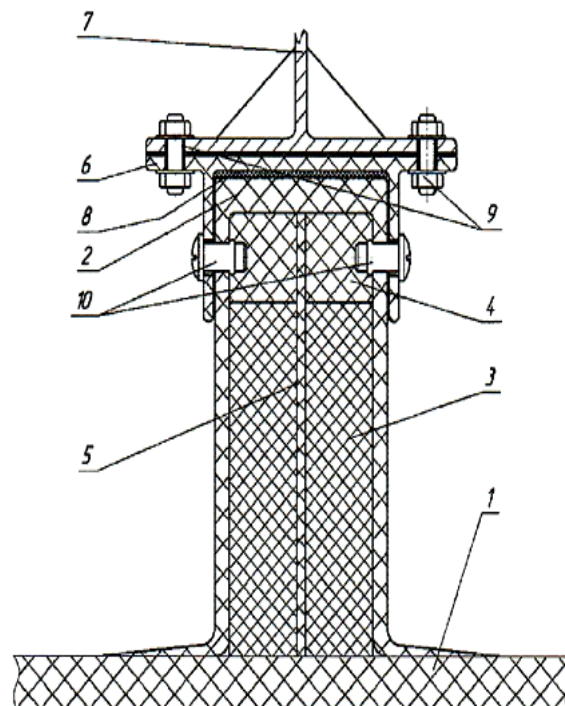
Joint of a support element of an engine (equipment) to the seating closed box section with the use of a closed box flanged element made of FRP, bolts and rivet nuts:
